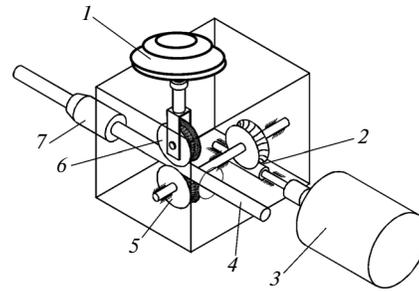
Structure of the device for feed the pipe blank: (1) pneumatic chamber; (2) worm gear; (3) electric motor; (4) pipe blank; (5) driving roller; (6) hold-down roller; (7) centering clamping bush.
